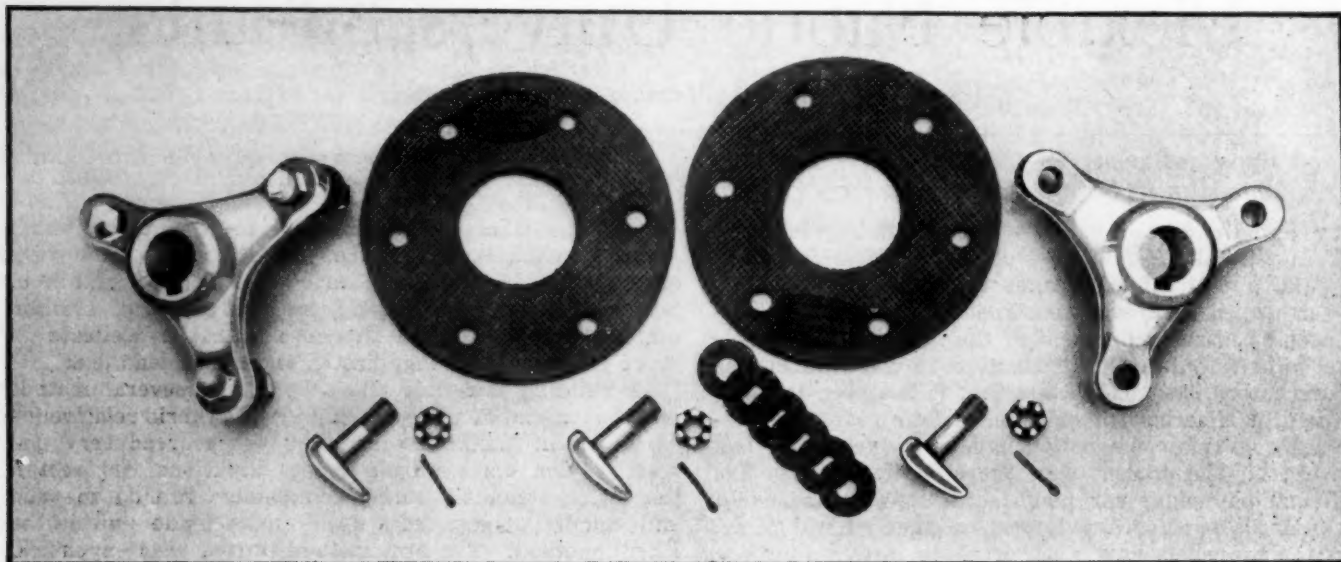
COMPONENT PARTS OF A FLEXIBLE FABRIC UNIVERSAL-JOINT
